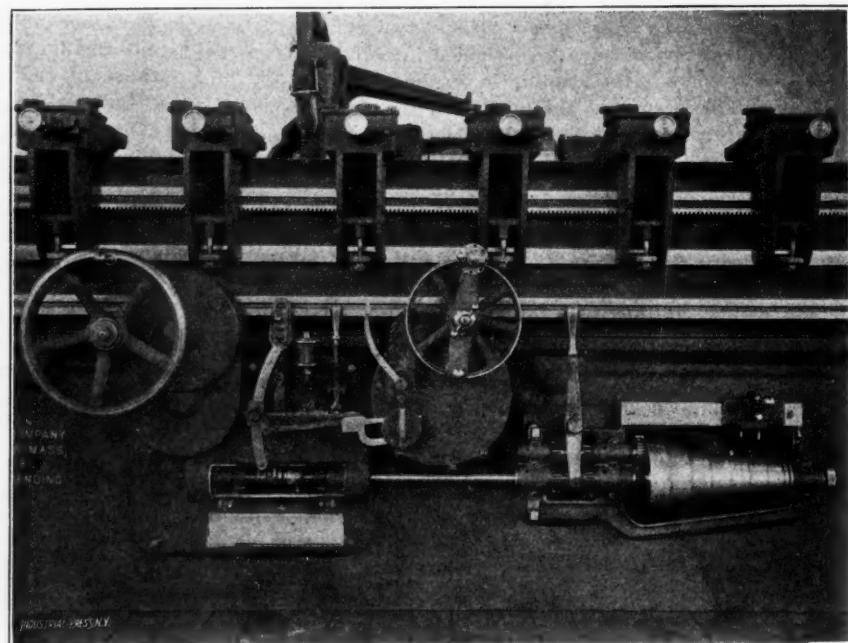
Enlarged View of Mechanism, showing Cone, Gears, Etc.
